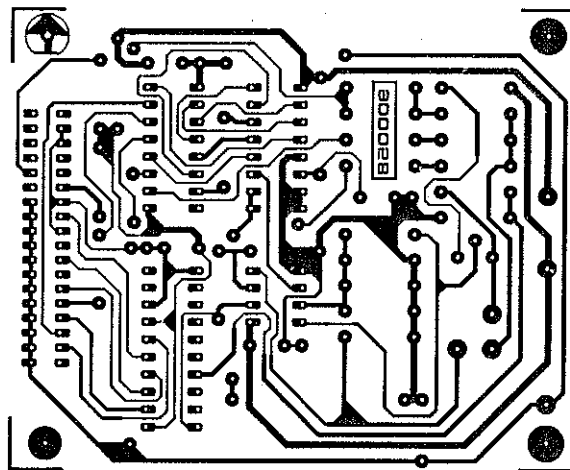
Track layout and component mounting plan of the single-sided printed-circuit board
